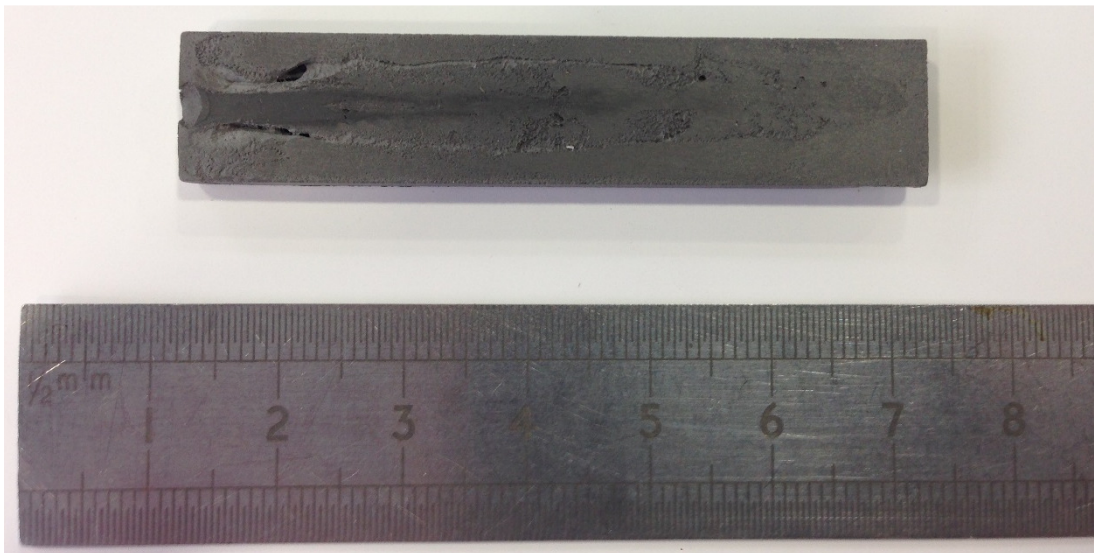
Inconel 718 sample moulded using PEG 1500 flat part showing powder separation (injection point on left hand side of image)
